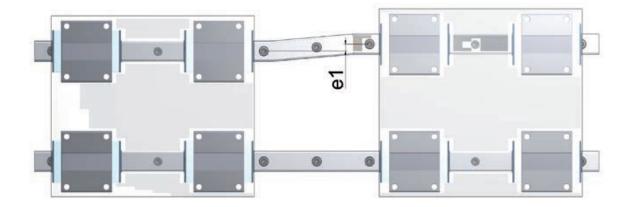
Parallelism tolerance between two rail guides e₁
